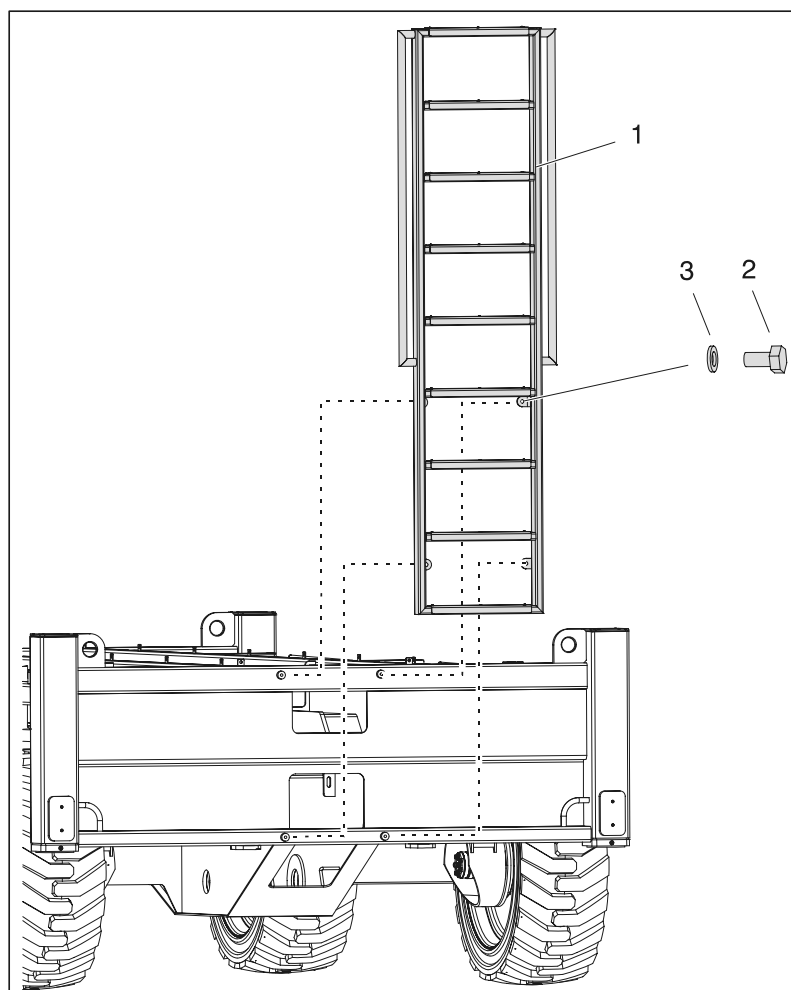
Platform Removal - 2 of 2 (Rear of Platform)
